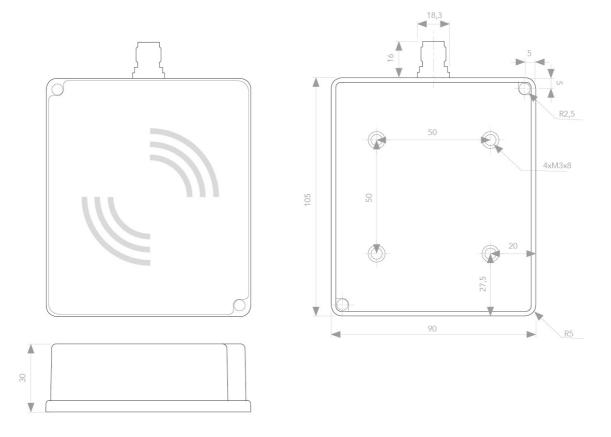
Drawing of Echo-5P (all dimensions in mm)
